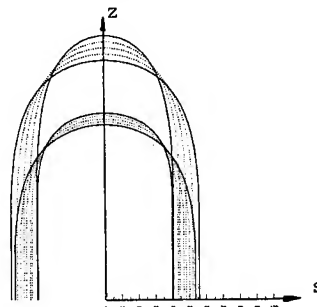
Polygons for endspacer machining with 5 axis milling machine for dipole model magnet.
